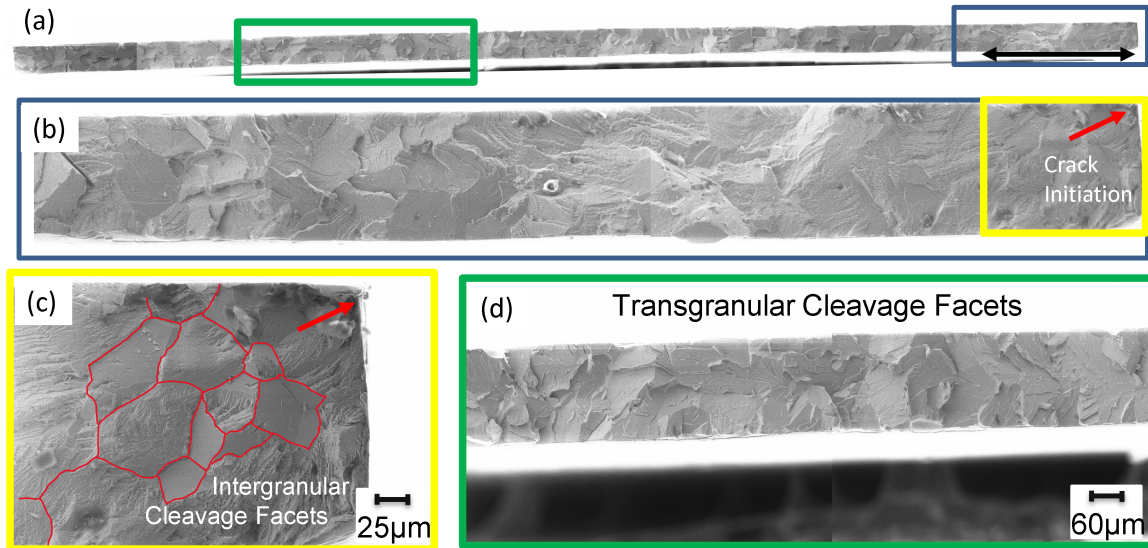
Fracture surface of single sheet sample at room temperature, high cycle fatigue, $N_f = 557,532$ cycles, (a) overall fracture surface (b) fatigue damage zone (c) crack initiation zone (c) trans-granular cleavage facets
